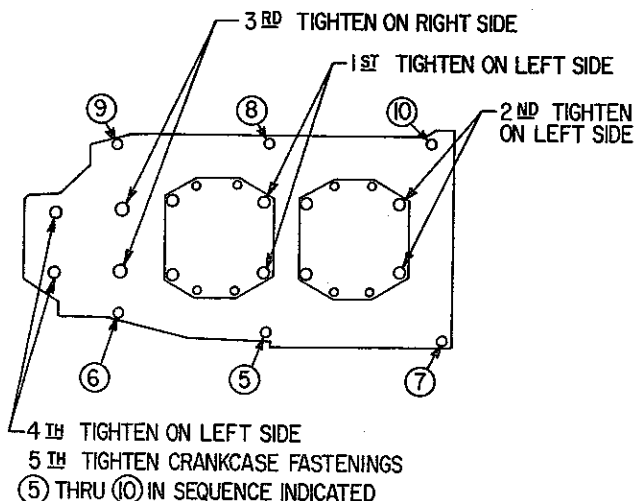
Crankcase Tightening Sequence (Four Cylinder Engines)
